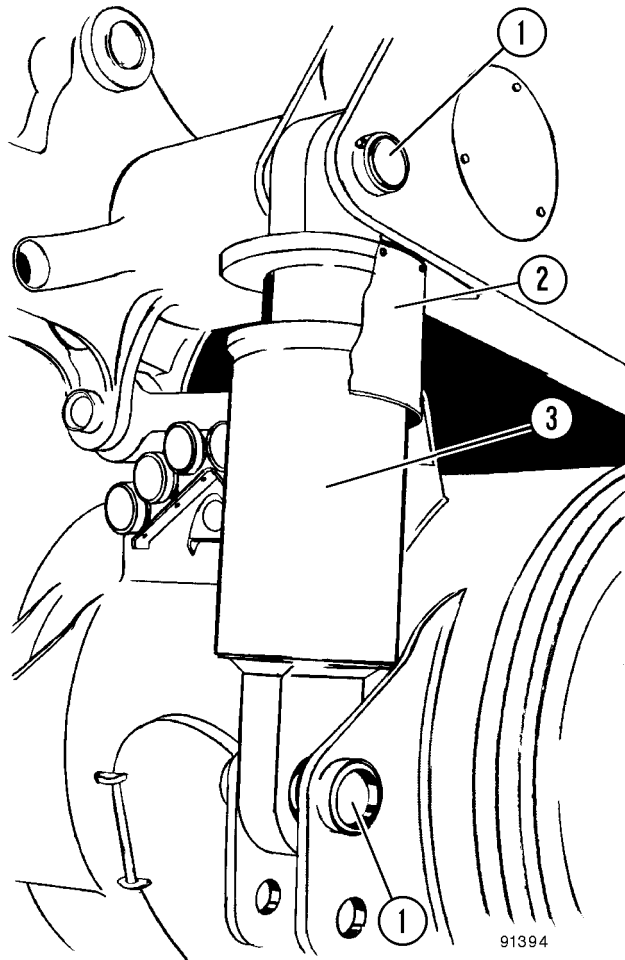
REAR SUSPENSION INSTALLATION
